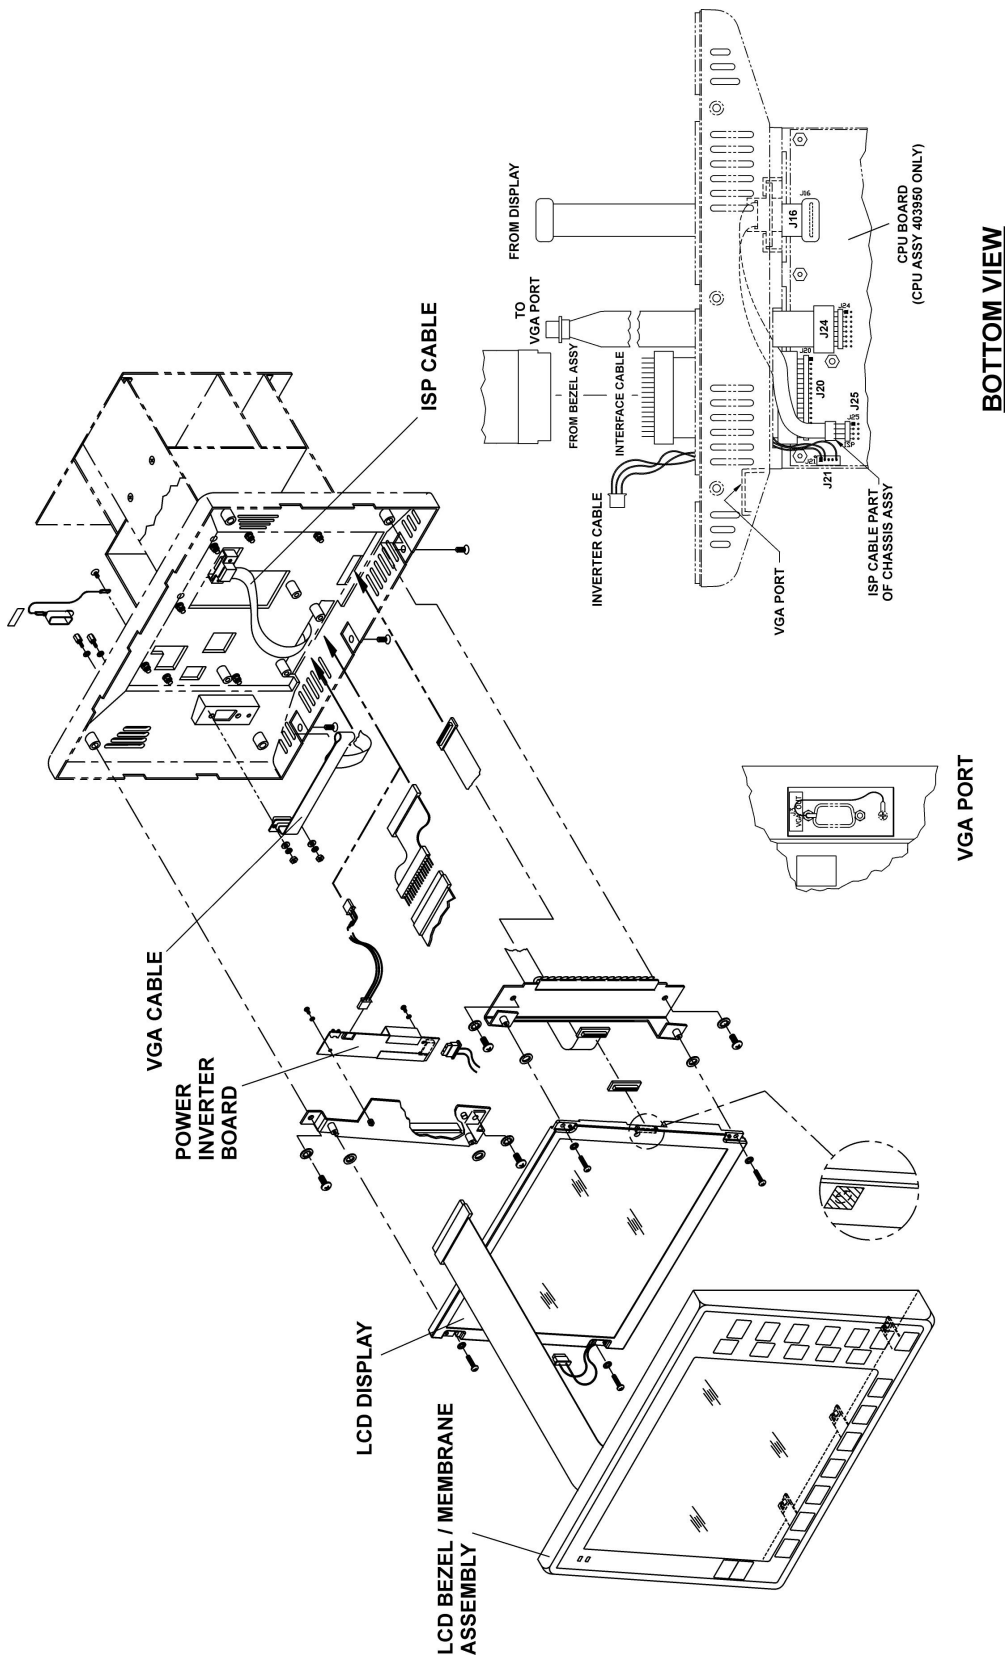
PRISM Color Display Assembly (NEC Display & CPU Board 403950)
